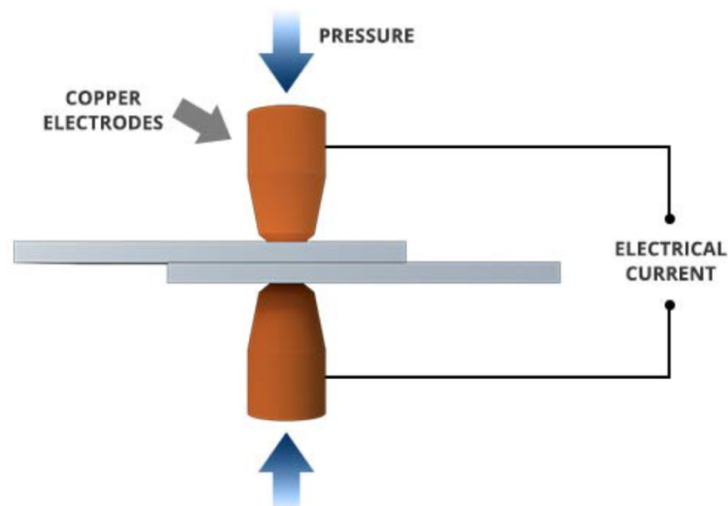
Resistance Spot Welding (RSW) [196]
